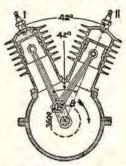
A two-cylinder twin type of engine used on motorcycles and light cars. Note the 360-degree crank. Cylinders are at a 42° angle.
